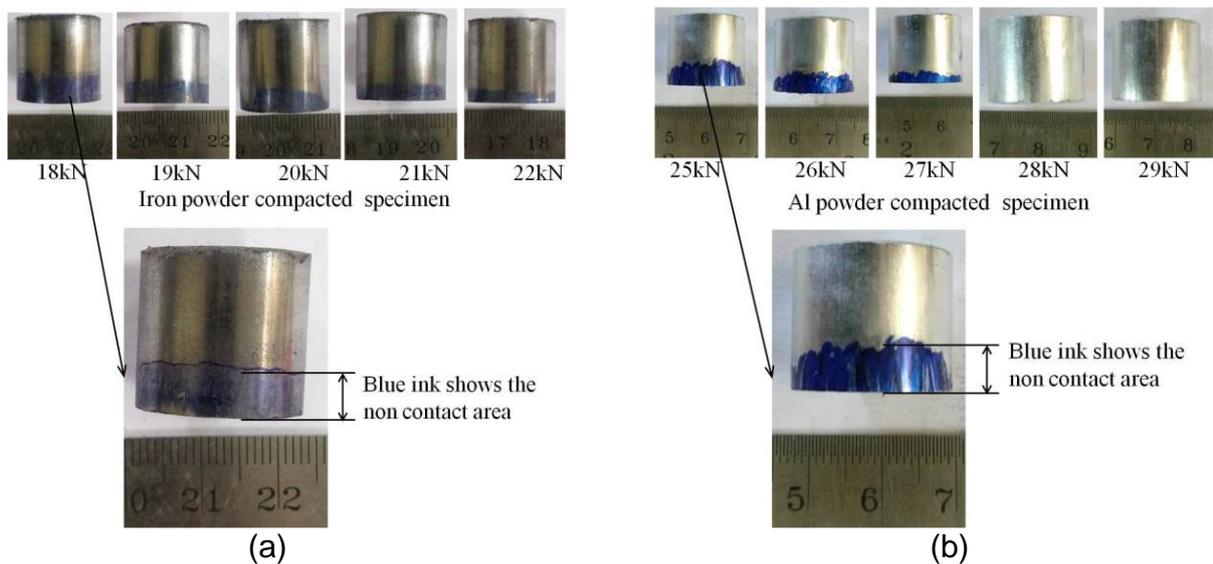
The close up view of the tested sample for, (a) iron and (b) aluminium
